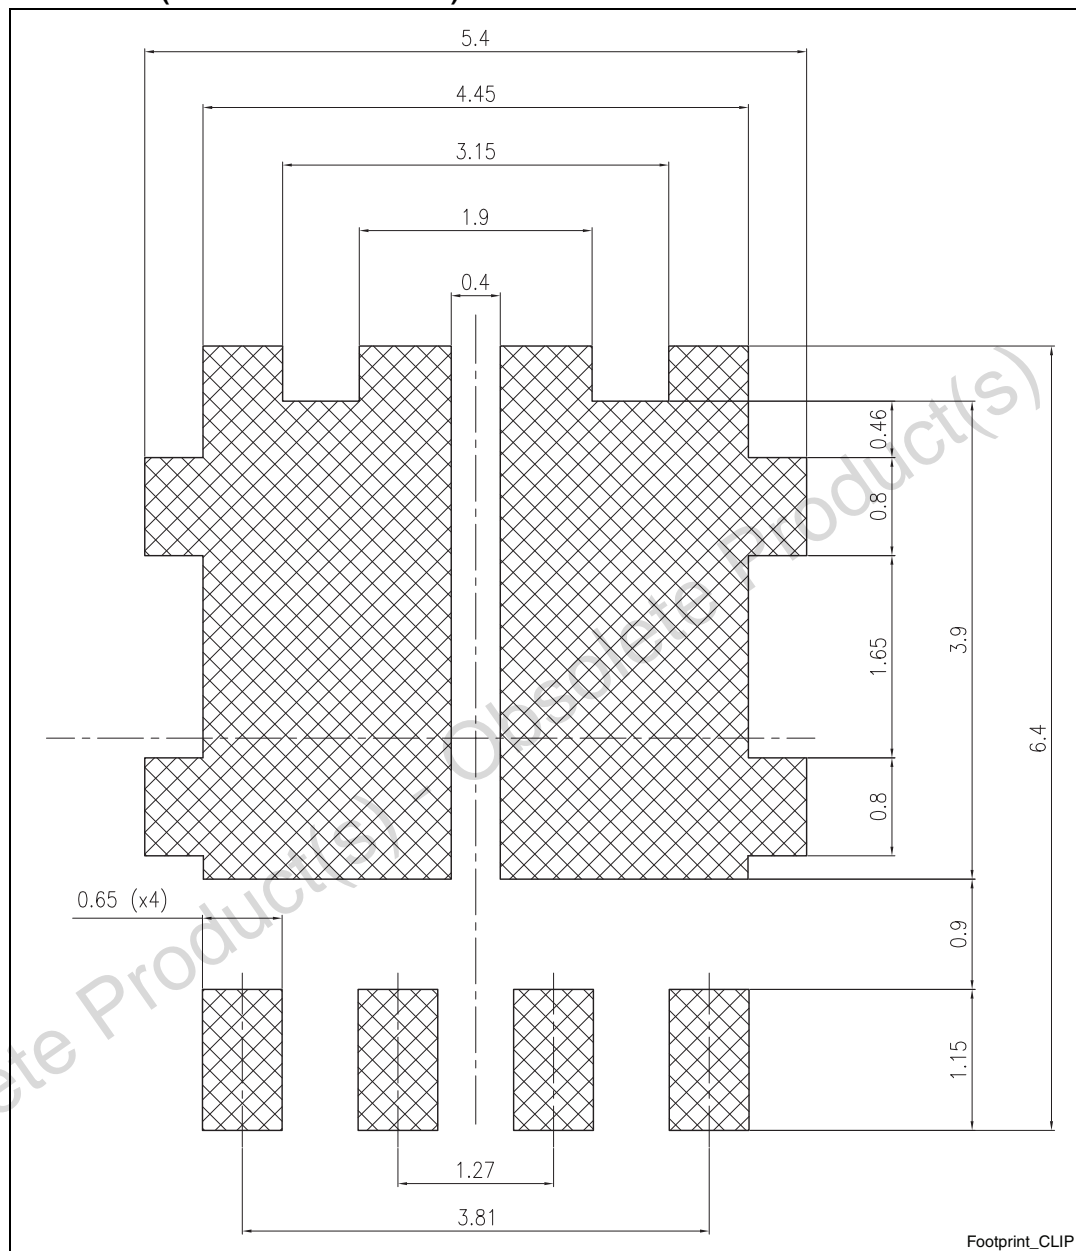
PowerFLAT™ 5x6 - 8 leads dual pad drawing recommended footprint (dimensions are in mm)
